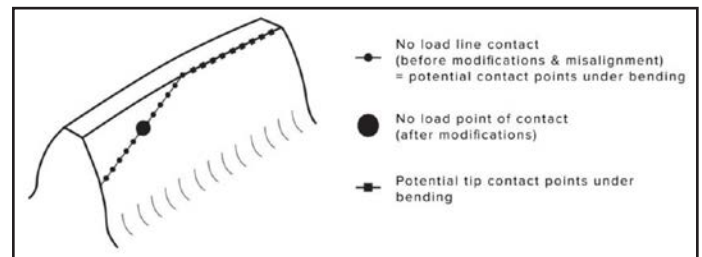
Potential contact line for helical gear tooth with flank modifications and extended contact along gear tip.
